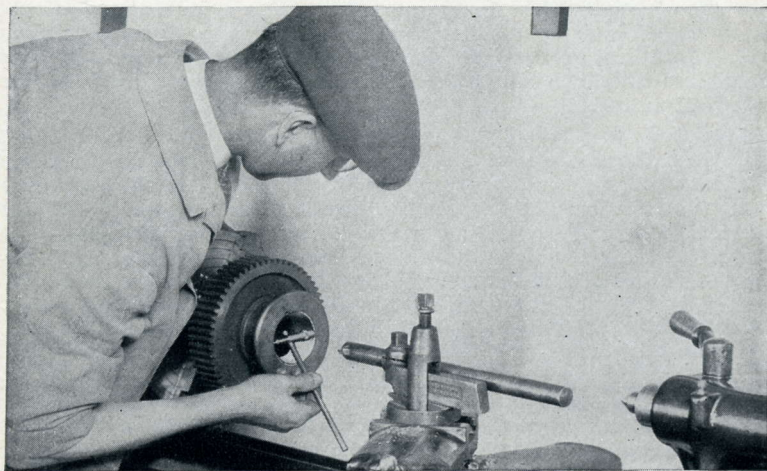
Using an Internal Micrometer Caliper Measuring the Diameter of a Machined Hole
